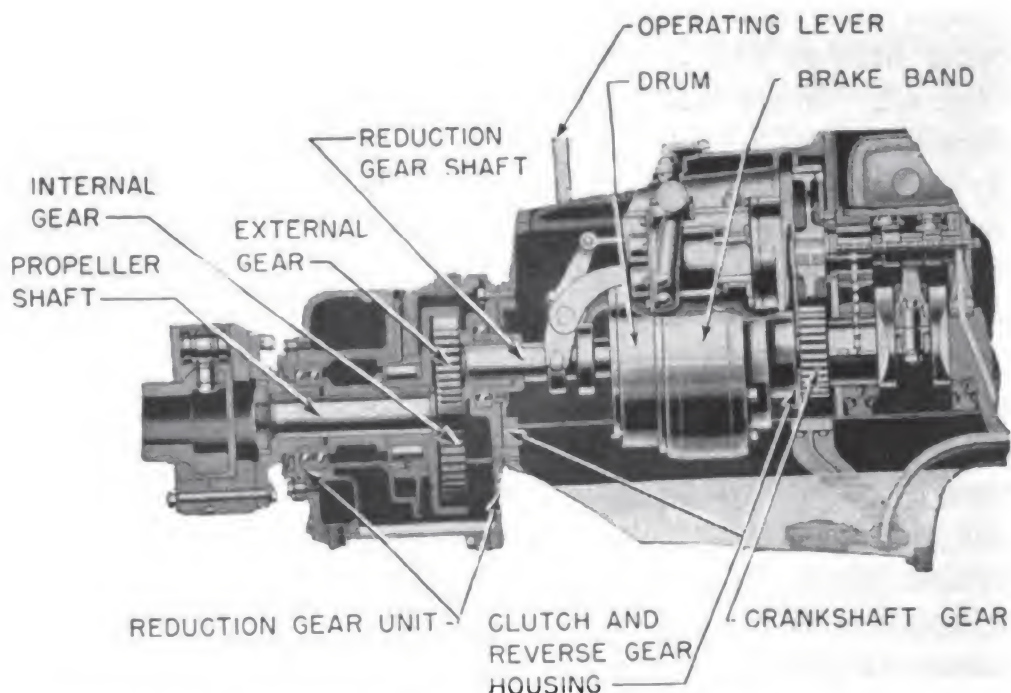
Reverse and reduction gear housings on Navy type DC engine.
